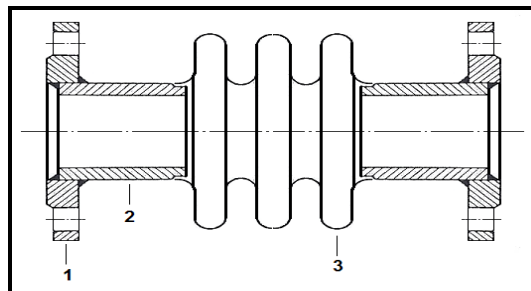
flange payment, 2 - socket pipe, 3 - elastic element lenticular
